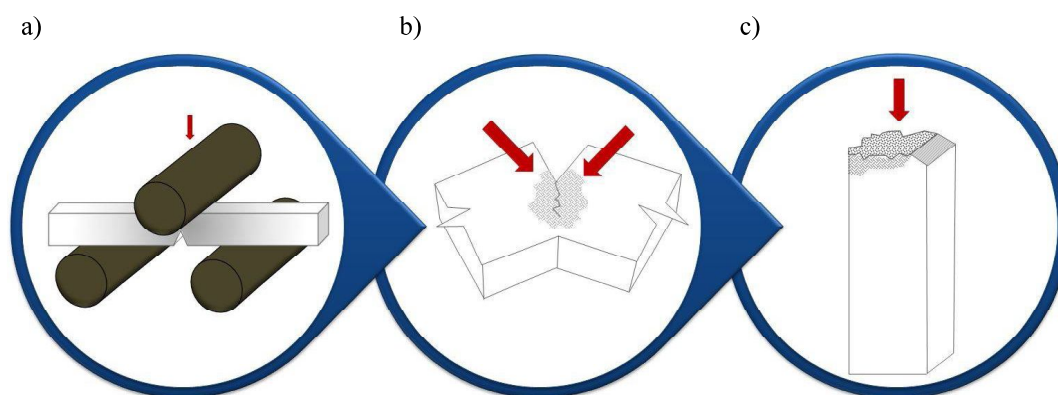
Schematic drawn of experimental steps: a) three points bending test, b) surface morphology in the crack vicinity, c) fractographic analysis
